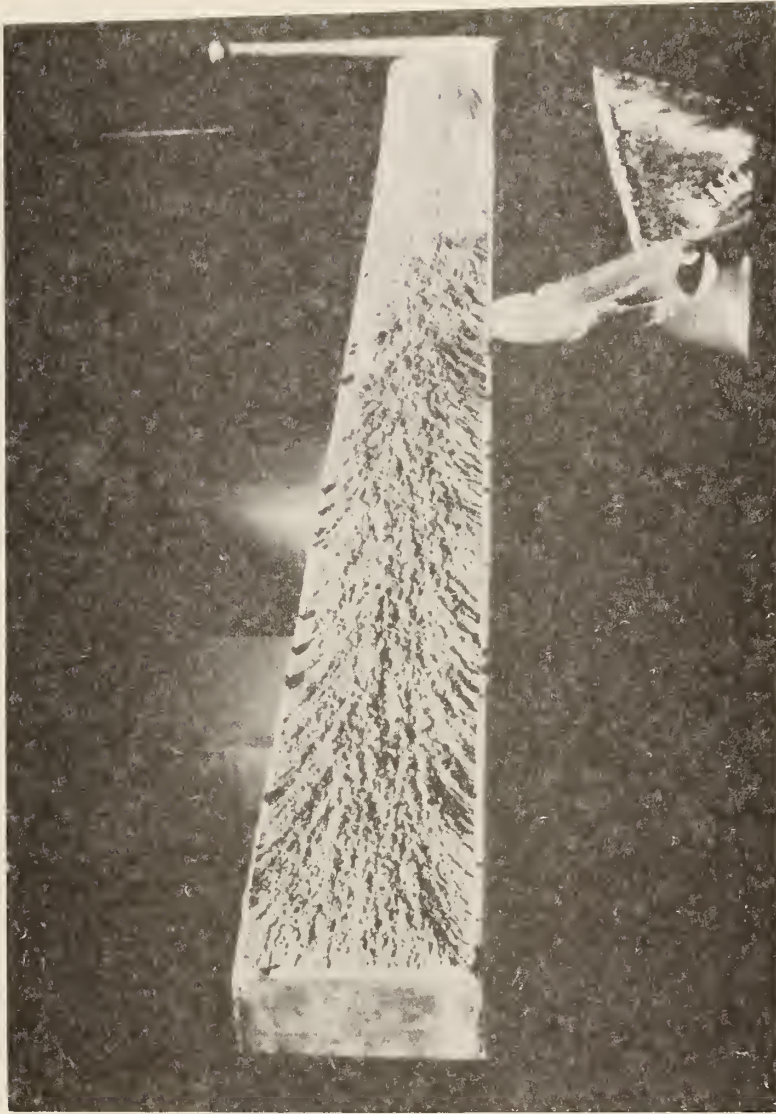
Photograph of typical brittle fracture surface in flange plate.
